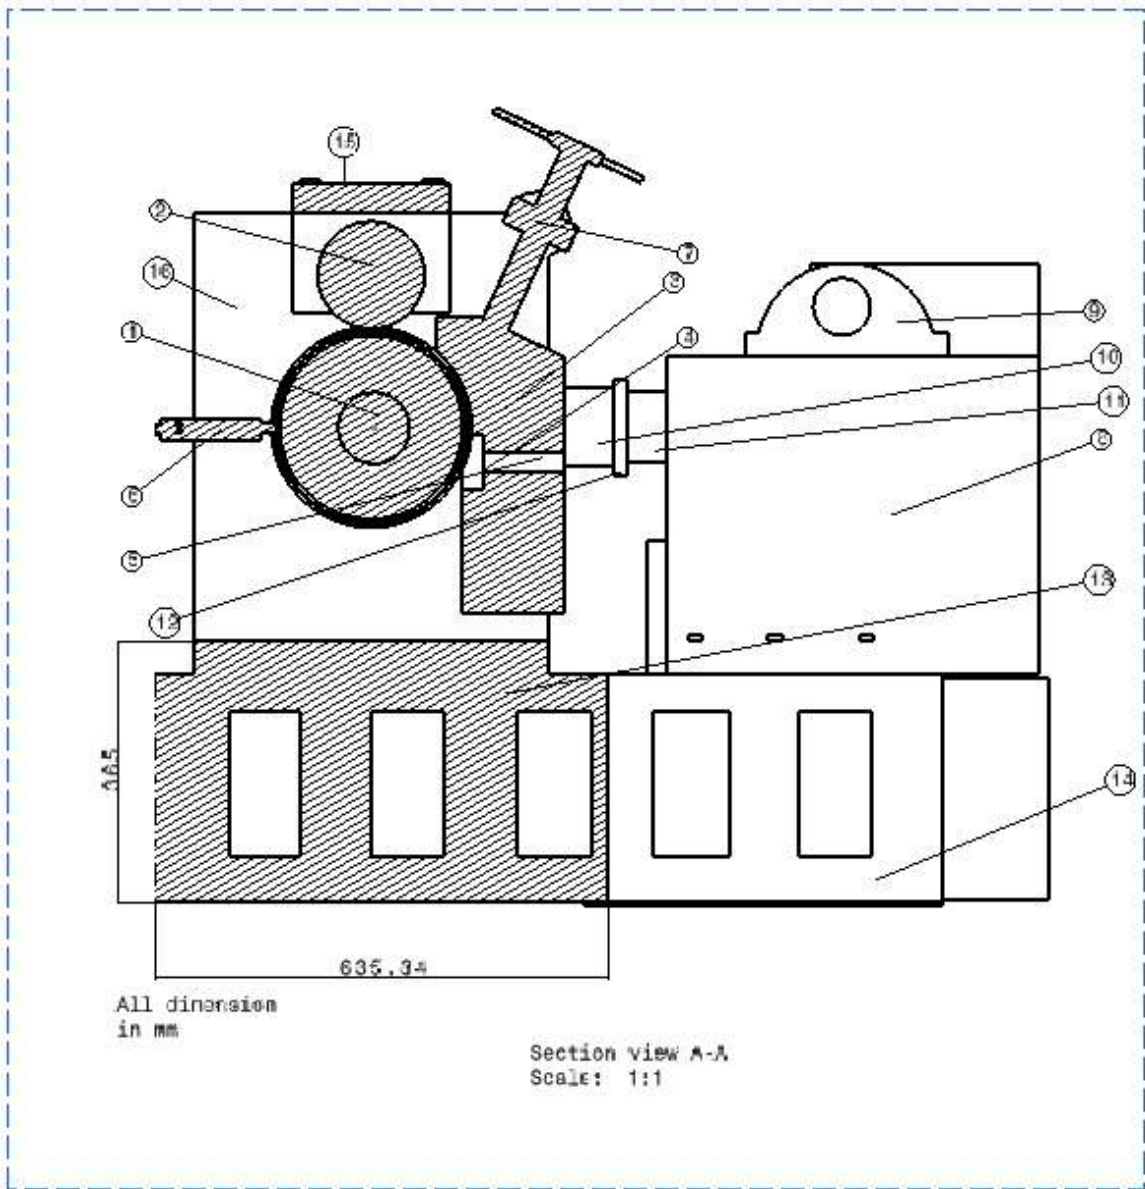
Sectional View of design developed and fabricated setup for 9.5 mm Aluminum feedstock
